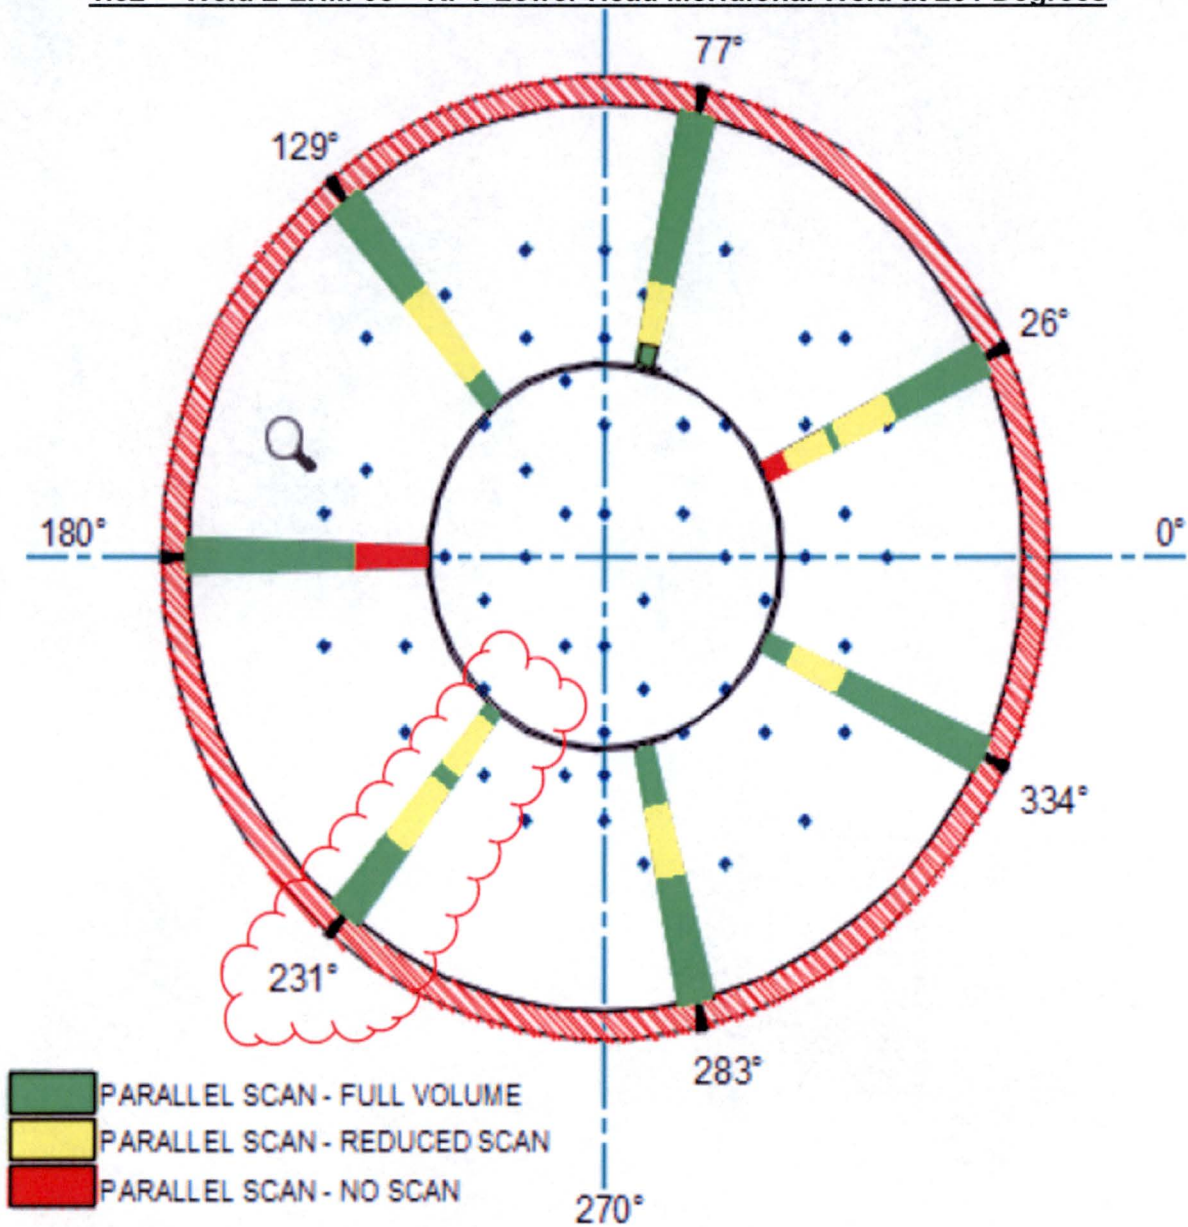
Weld 2-LHM-05 (Extracted from Reference DRAWING 2A-1)
